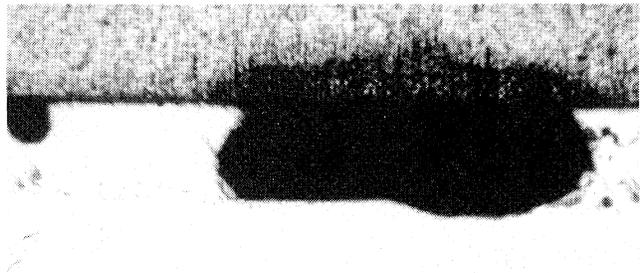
Poor Brazing of the Contacts to the Support Casting. Mag. 75x.
